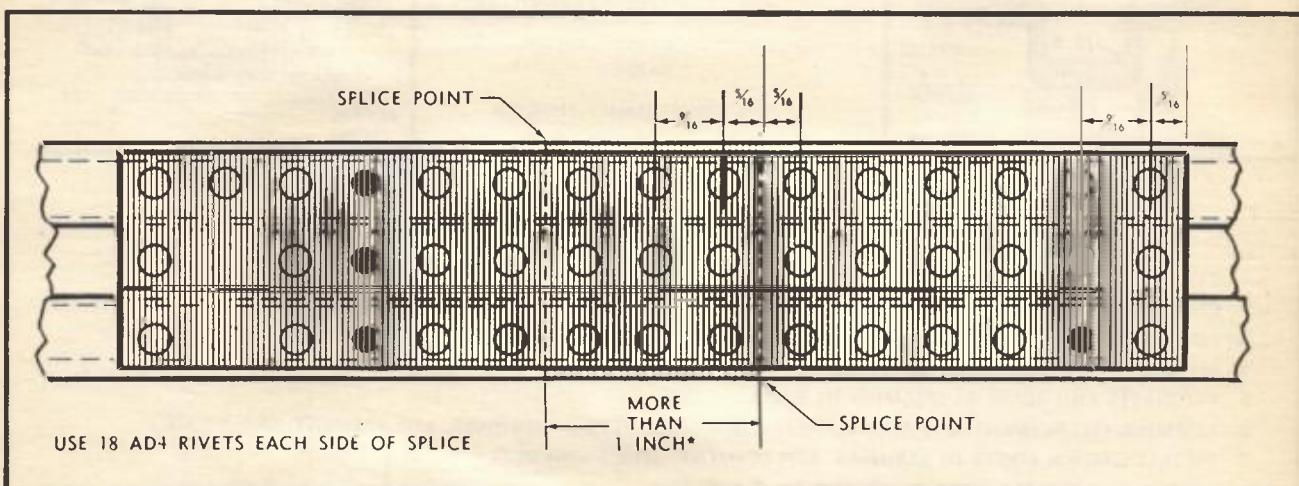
(Sheet 1 of 2 Sheets) — Fuselage Stringer Repair — Rolled Hat Section
